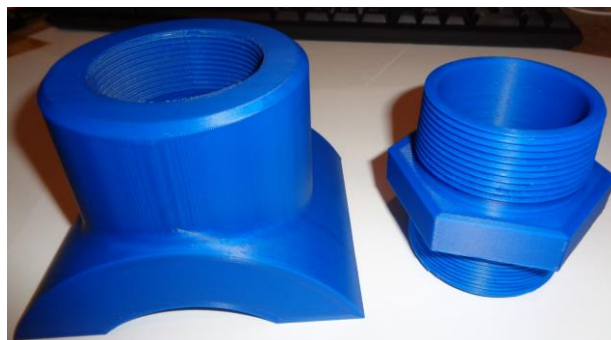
The landmark Gas Reduction R2-M60x2 manufactured by additive 3D printing on the Creality Ender 3 V2 3D printer
